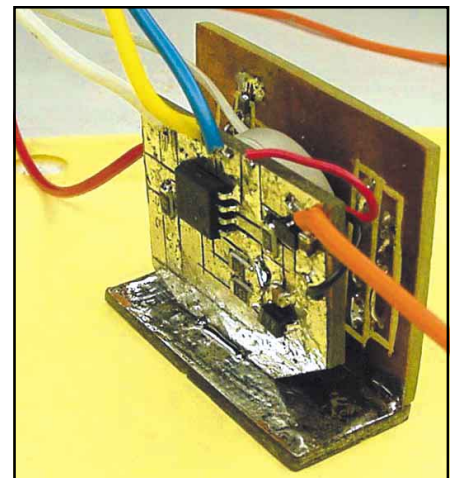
Soldering the IC board to the top board between the touch pad boards.
